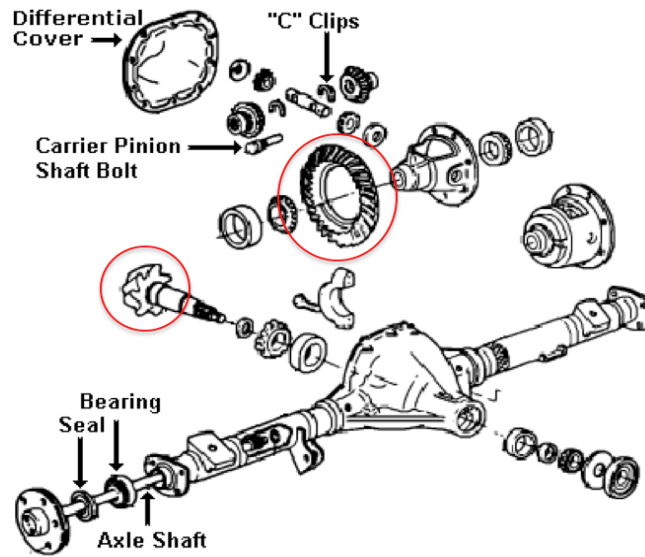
Location of ring and pinion gear in Ford Ranger rear axle assembly
